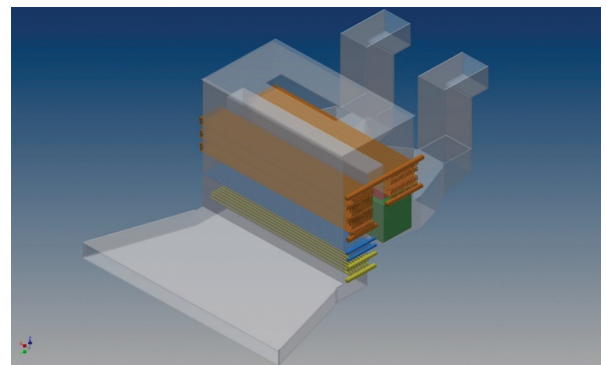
Location of the new MP steam coil in the convection section of the reformer furnace – blue coil
